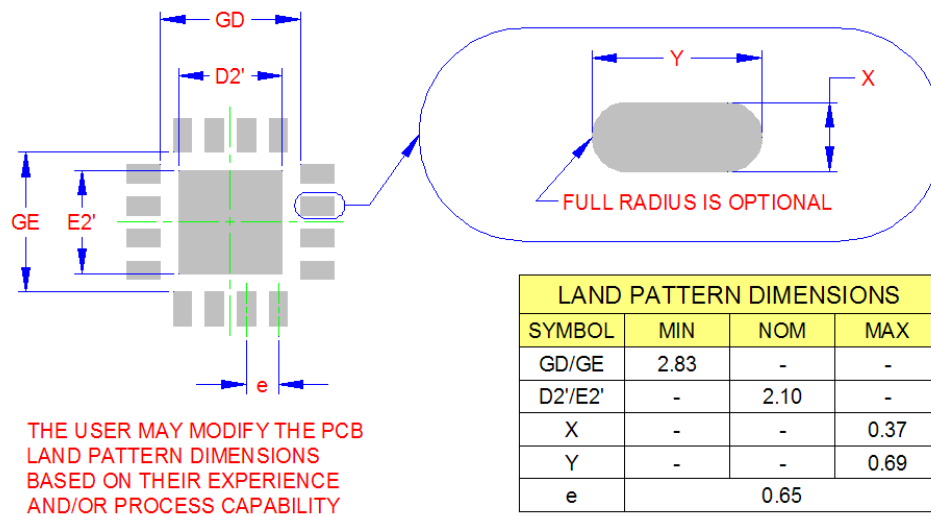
16-Pin QFN 4mm x 4mm Package Drawings
